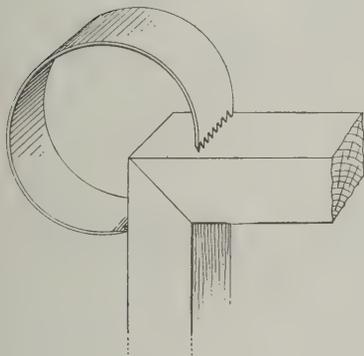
Small Clamp with Teeth Made from Piece of Door Spring
